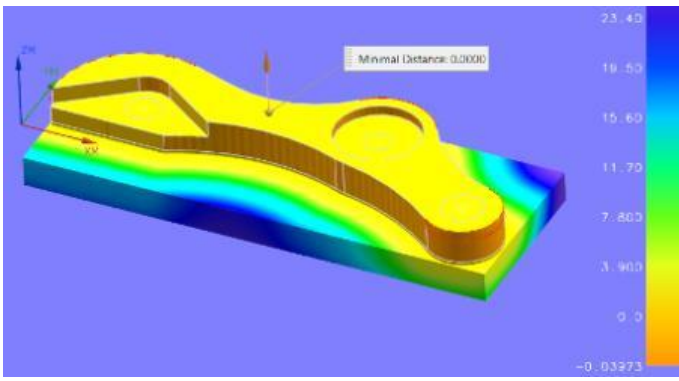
Comparison of the dimensions of the machined workpiece with the 3D model
